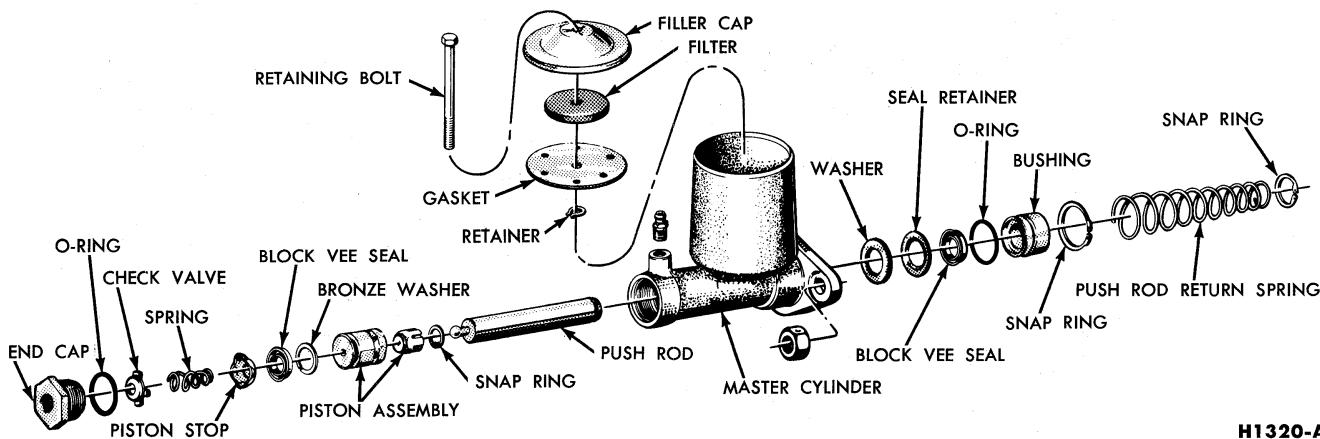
Dash-Mounted Master Cylinder Disassembled H1320-A
